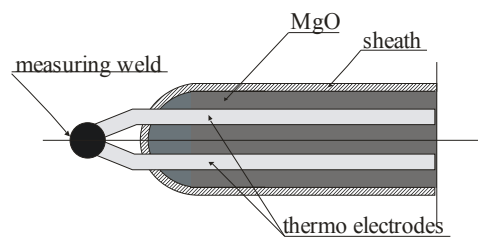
Longitudinal section of the final segment of the sheathed thermocouple with open weld
